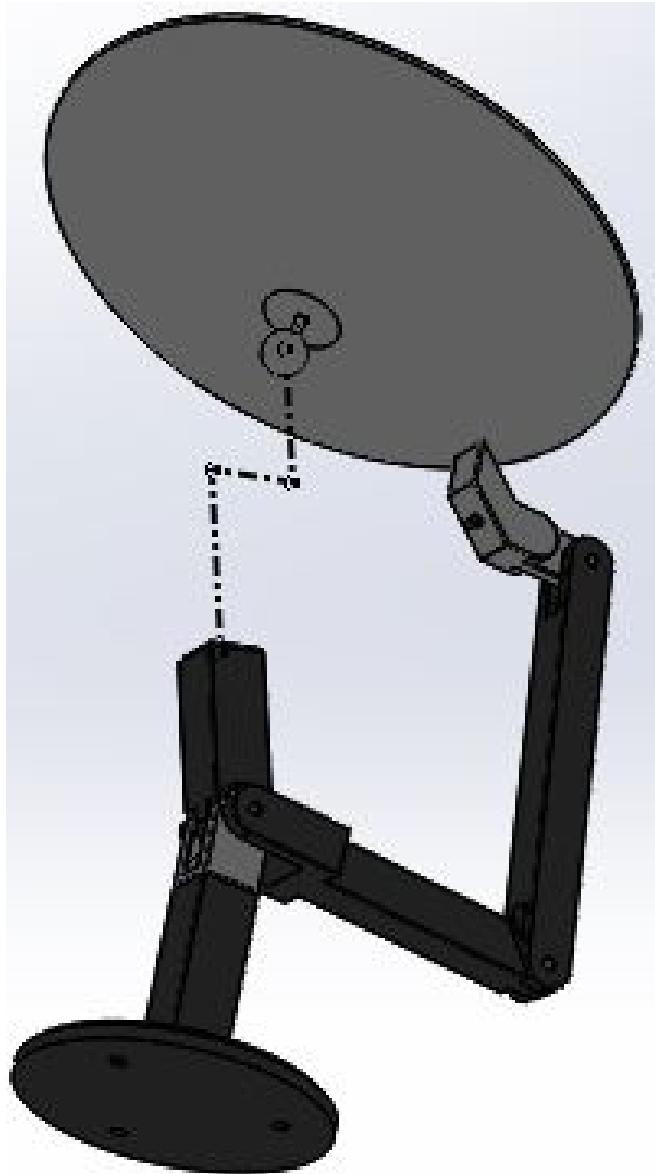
Rodriguez, Juan: Assembly Step 5
